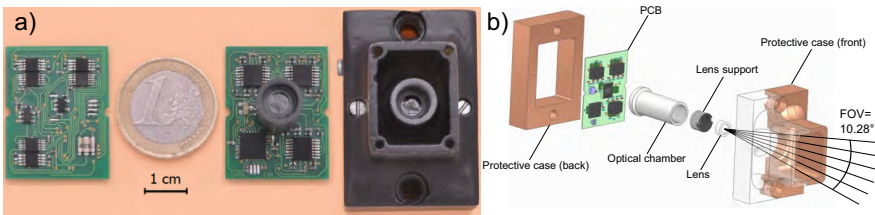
(a) Top and bottom view of the electronic board (size: 33×40 mm) of a low-speed visual motion sensor with its lens mounted on the LSC photosensor array. The custom-made protective case is presented on the right. (b) Exploded view of the complete assembly, including the custom-made protective case (front and back), the electronic board, and the optical assembly (lens, lens support, optical chamber).
